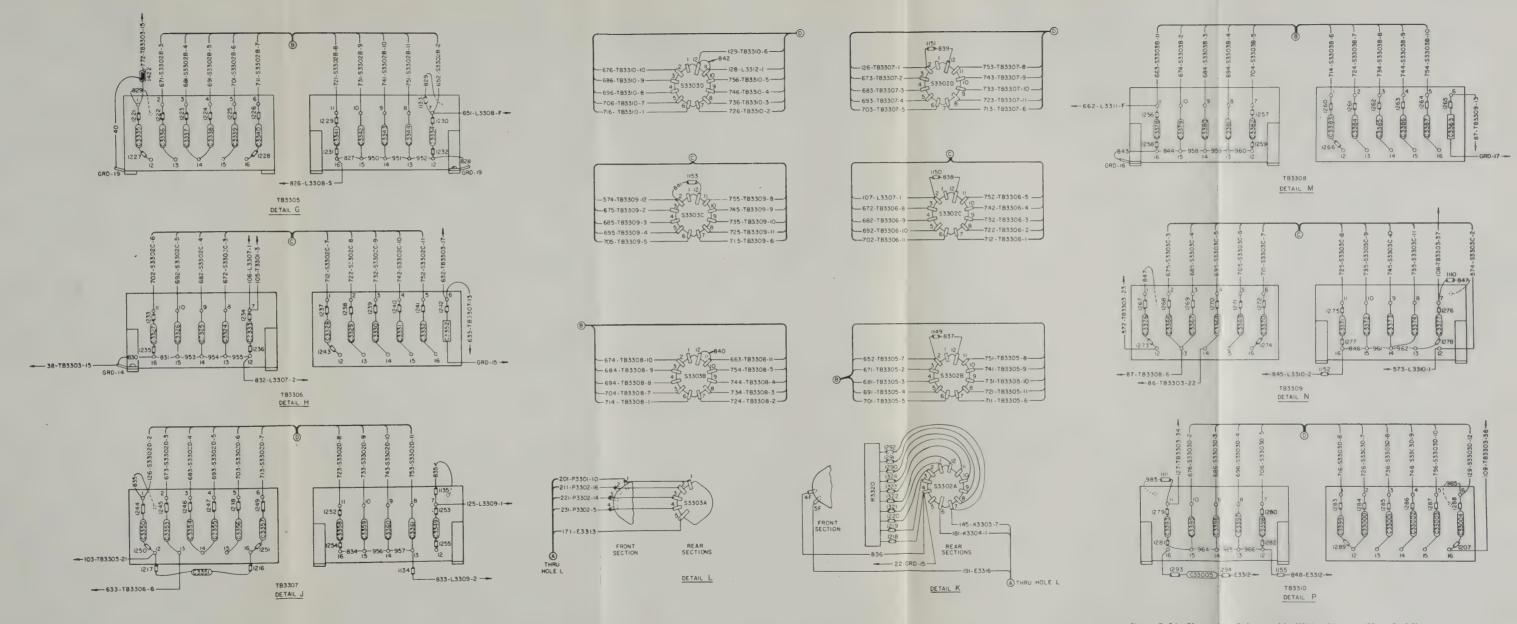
Channelizer Subassembly, Wiring Diagram (Sheet 3 of 5)
